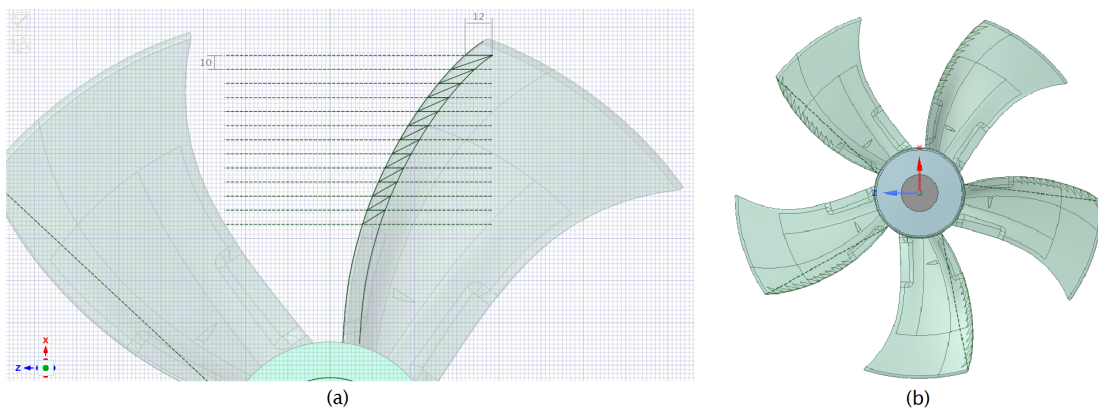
Serrated trailing edge design a) auxiliary lines and dimensions b) removed triangular areas.
